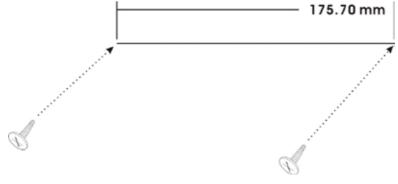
Wall-Mounting Bracket - Bottom of HS960
